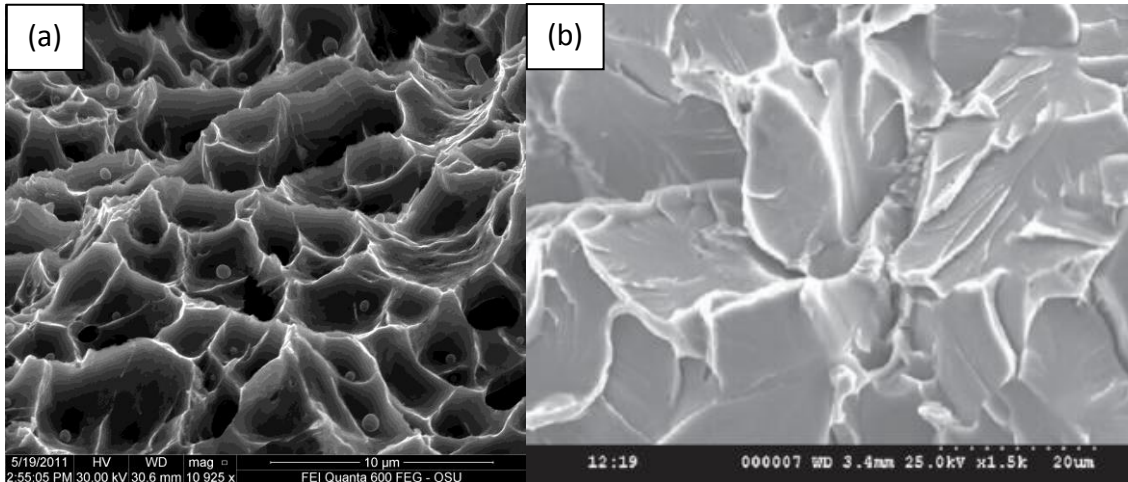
a) Ductile Fracture surface b) Brittle intergranular fracture
